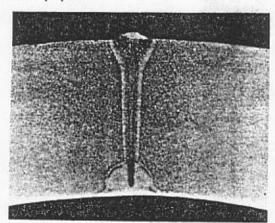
Macrosection of EB welds of boiler drum
